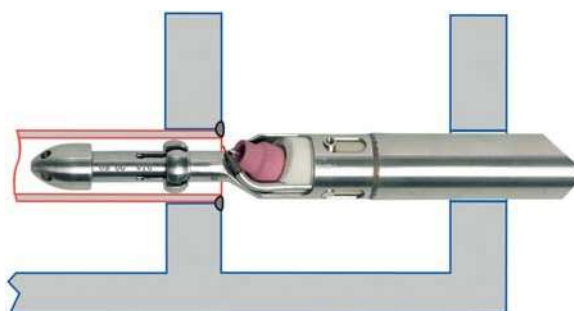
+ 3b. Welding head for heavy wall multilayer applications.
